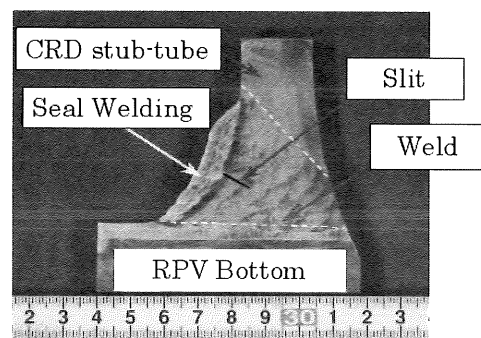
Section macro test of TIG seal welding on the CRD stub-tube welding portion
